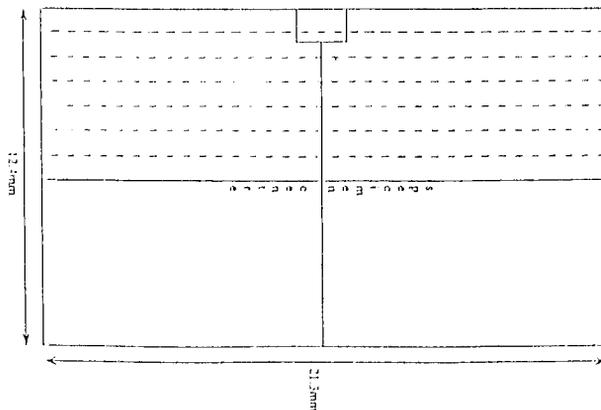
Surface removal followed by blind-hole drilling to the centre of the specimen
